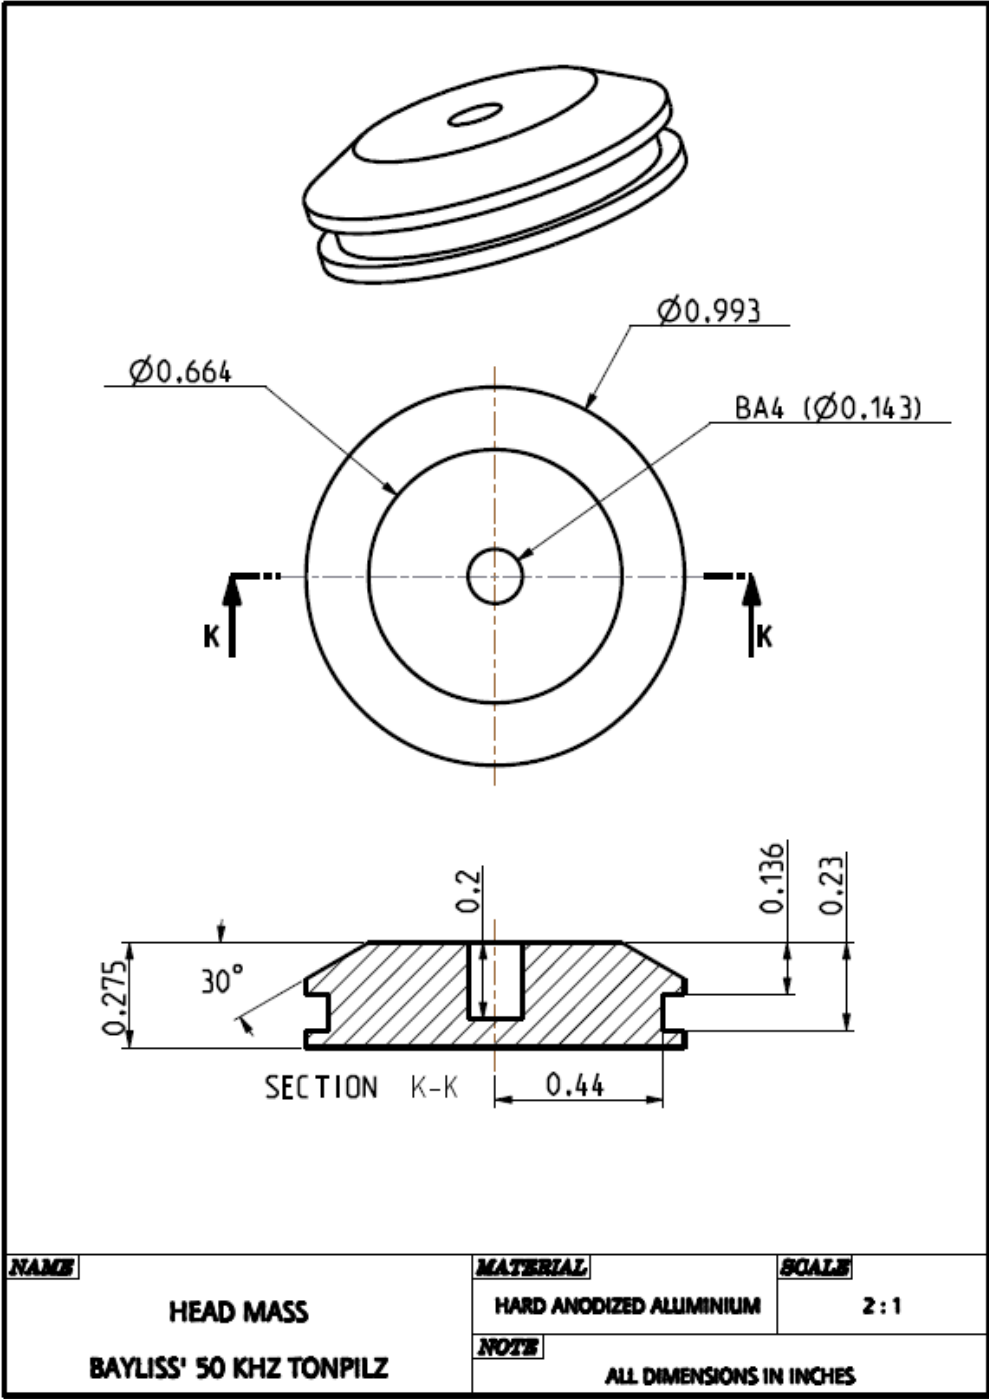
Technical drawing of Bayliss' 50 kHz Tonpilz's head mass (Adapted from [75])
